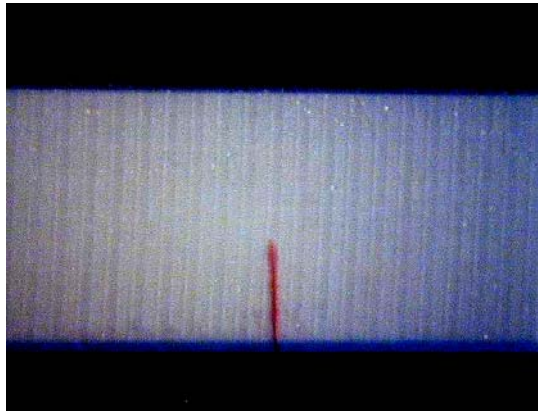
A typical example of a precracked SEPB fracture toughness specimen. A precrack is shown as a (red) line revealed through dye penetrant.
